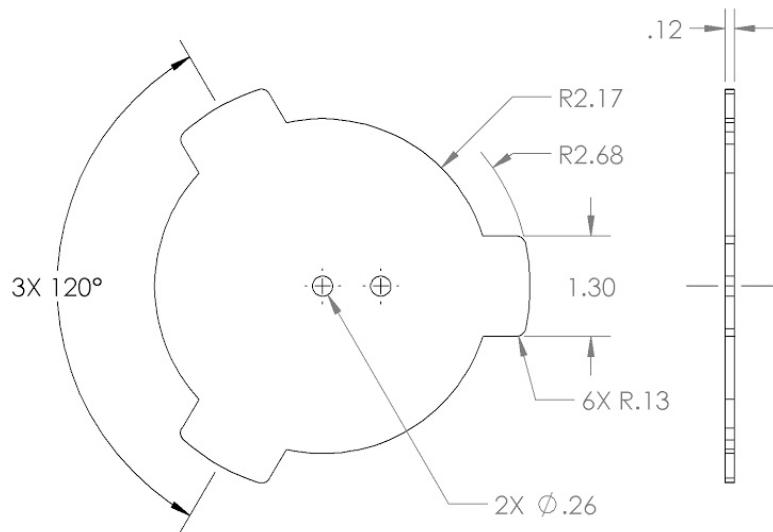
Locking Mechanism Inner Ring Reinforcement Drawing
